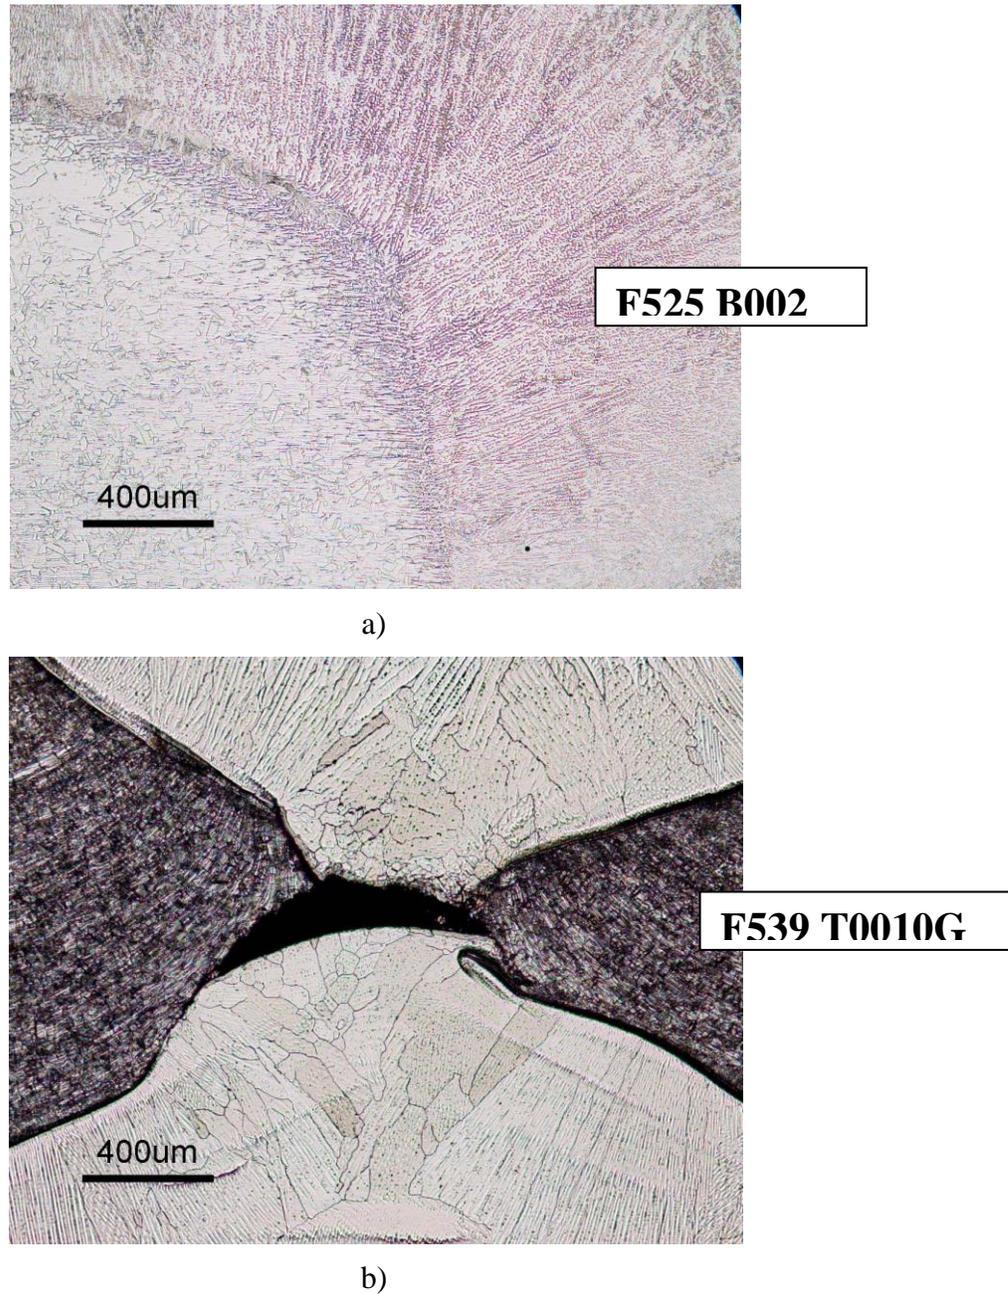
Microstructure: (a) of the ER308LSi Baseline Weld; and (b) of the ERNiCuRu Test Weld with a Root Lack of Fusion Defect
